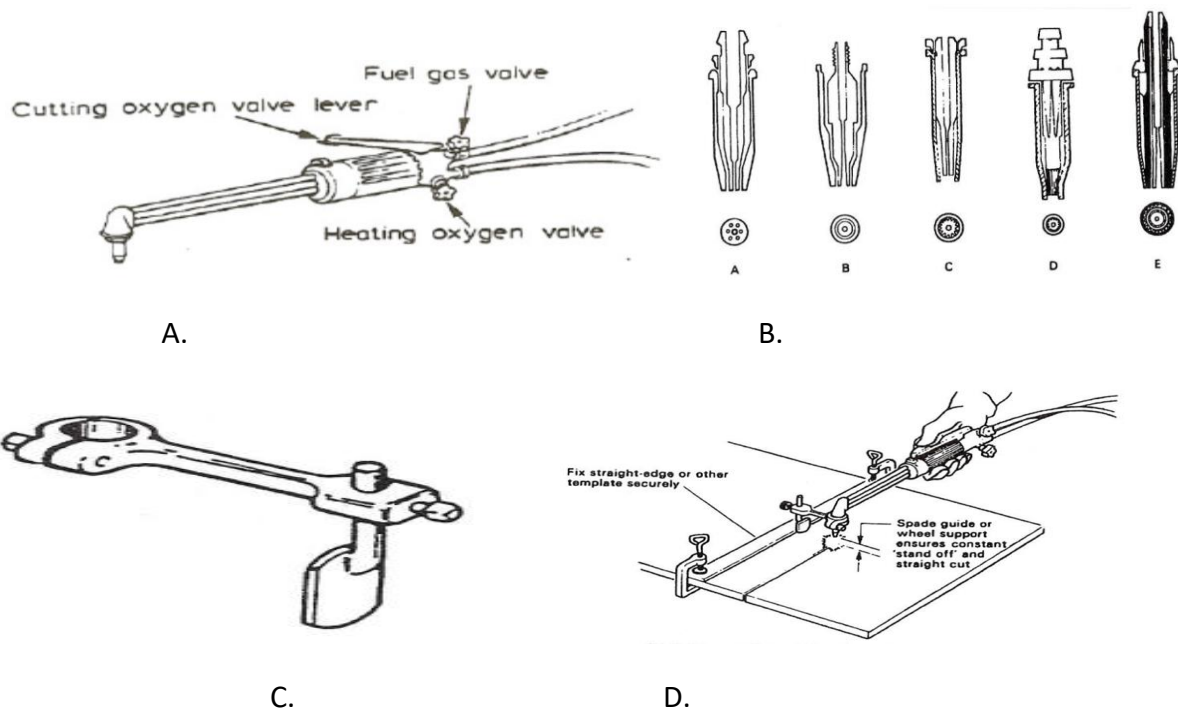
component parts of oxy-fuel cutting equipment (A).Cutting Torch, (B). Typical Cutting Nozzle Design Feature, (C). Spade Guide and (D).Cutting with straight edge and single support.
